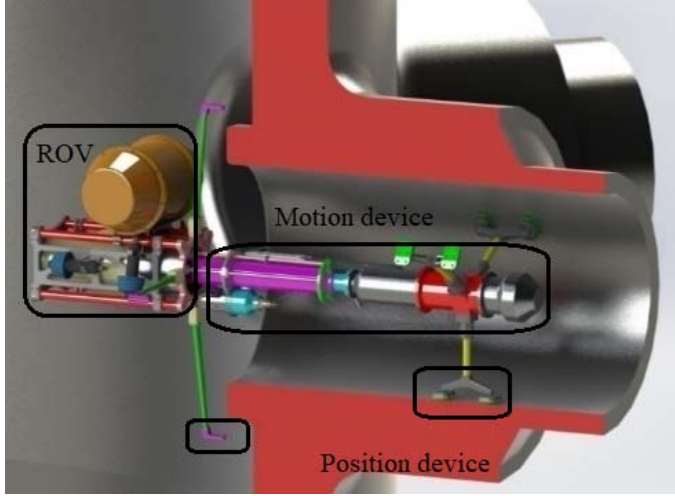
Inspection system for the inner radius of RPV nozzles
